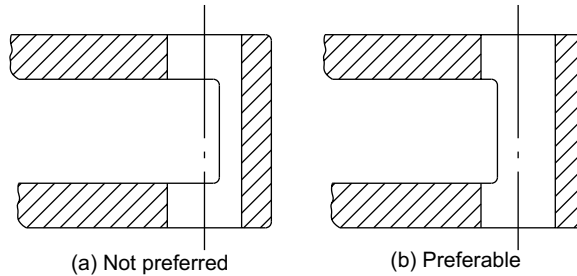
Drill axis should be perpendicular to the hole entry surface
